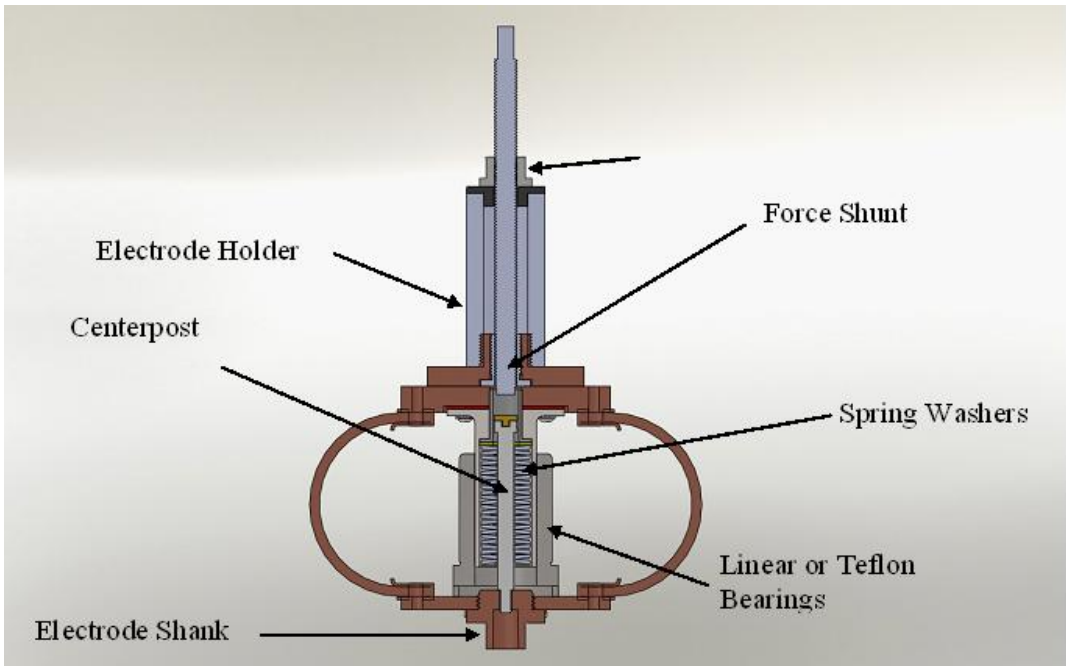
Fast Follow-Up Head used in this Program [Initial configuration used Teflon bearings, later replaced by linear bearings. Finally, a force shunt (center rod) was installed to set the level of effective forge force during welding.]
